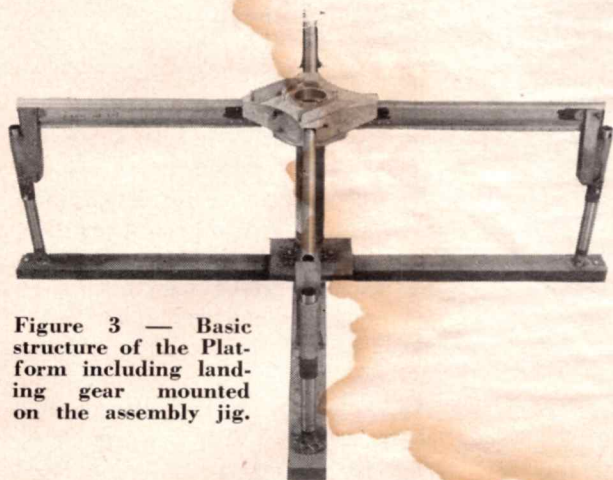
Basic structure of the Platform including landing gear mounted on the assembly jig.
